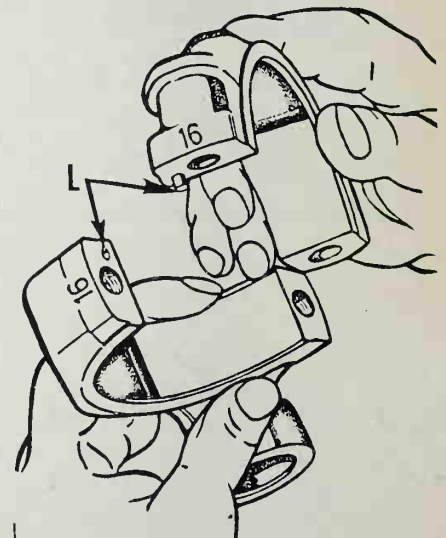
Assemble cap on rod so locating pin and hole (L) are properly mated.
